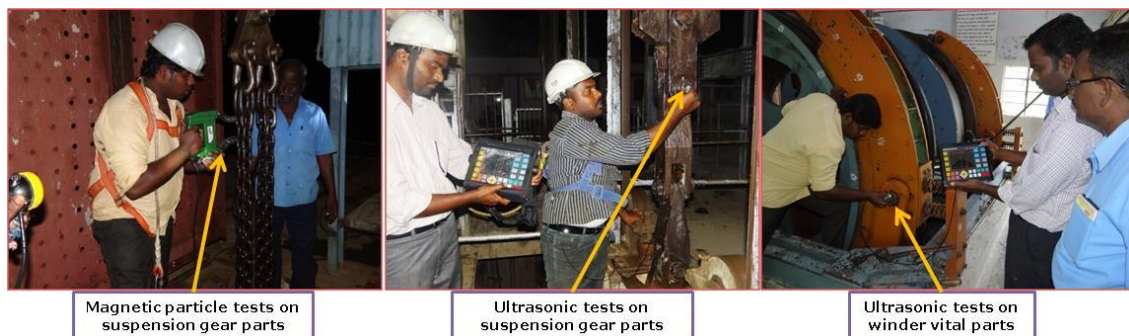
NDT on winder vital components, suspension gear parts, M/s HGML
